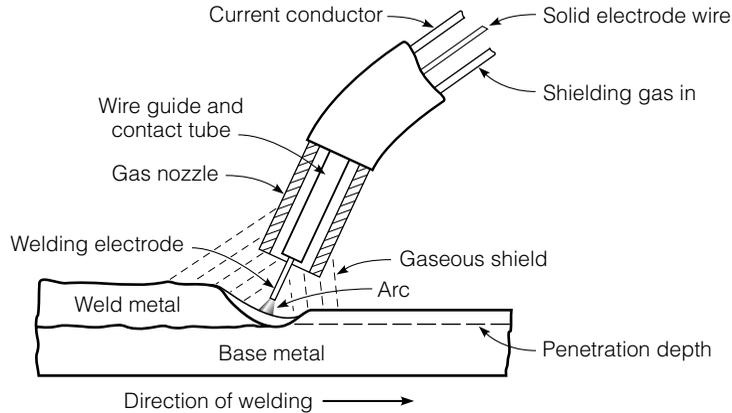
Schematic drawing of arc welding.
